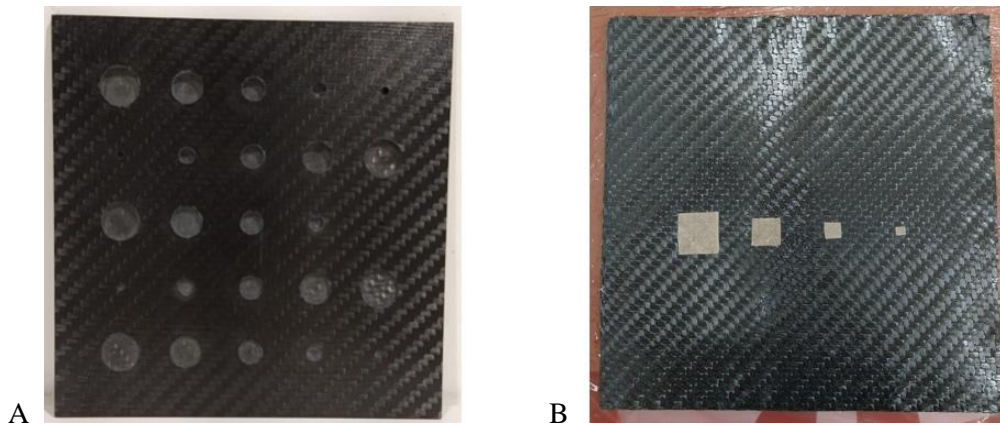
Carbon fiber composite panels: a 15-ply panel containing machined FBHs (A); intermediate ply with PTFE inserts (B).
